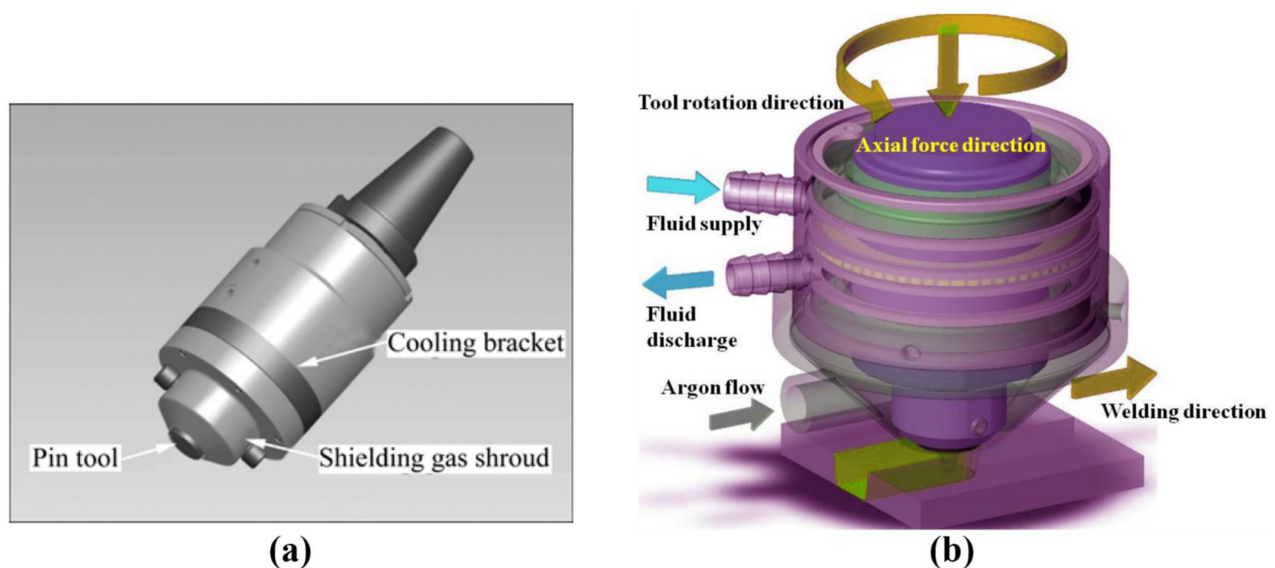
Schematic of friction stir welding process of titanium alloys with tool cooling system and argon blowing of the welding zone from paper (Reprinted with permission from [353] 2010, Elsevier) (a) and paper (Reprinted with permission from [368] 2023, MDPI) (b).
